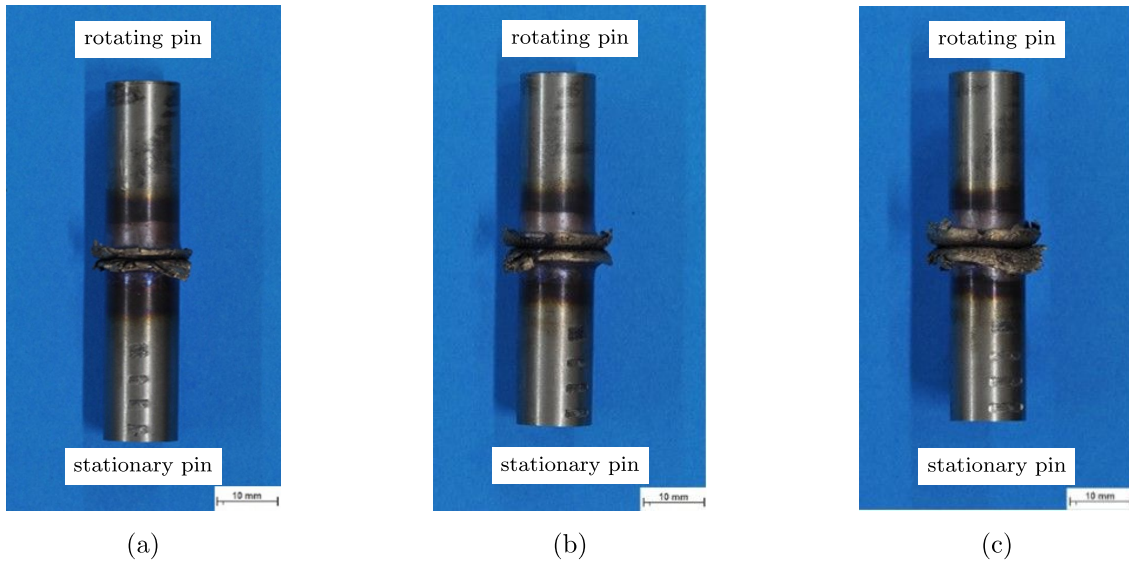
As-welded RFW molybdenum specimens (a) 2500 rpm (b) 2600 rpm (c) 2750 rpm
